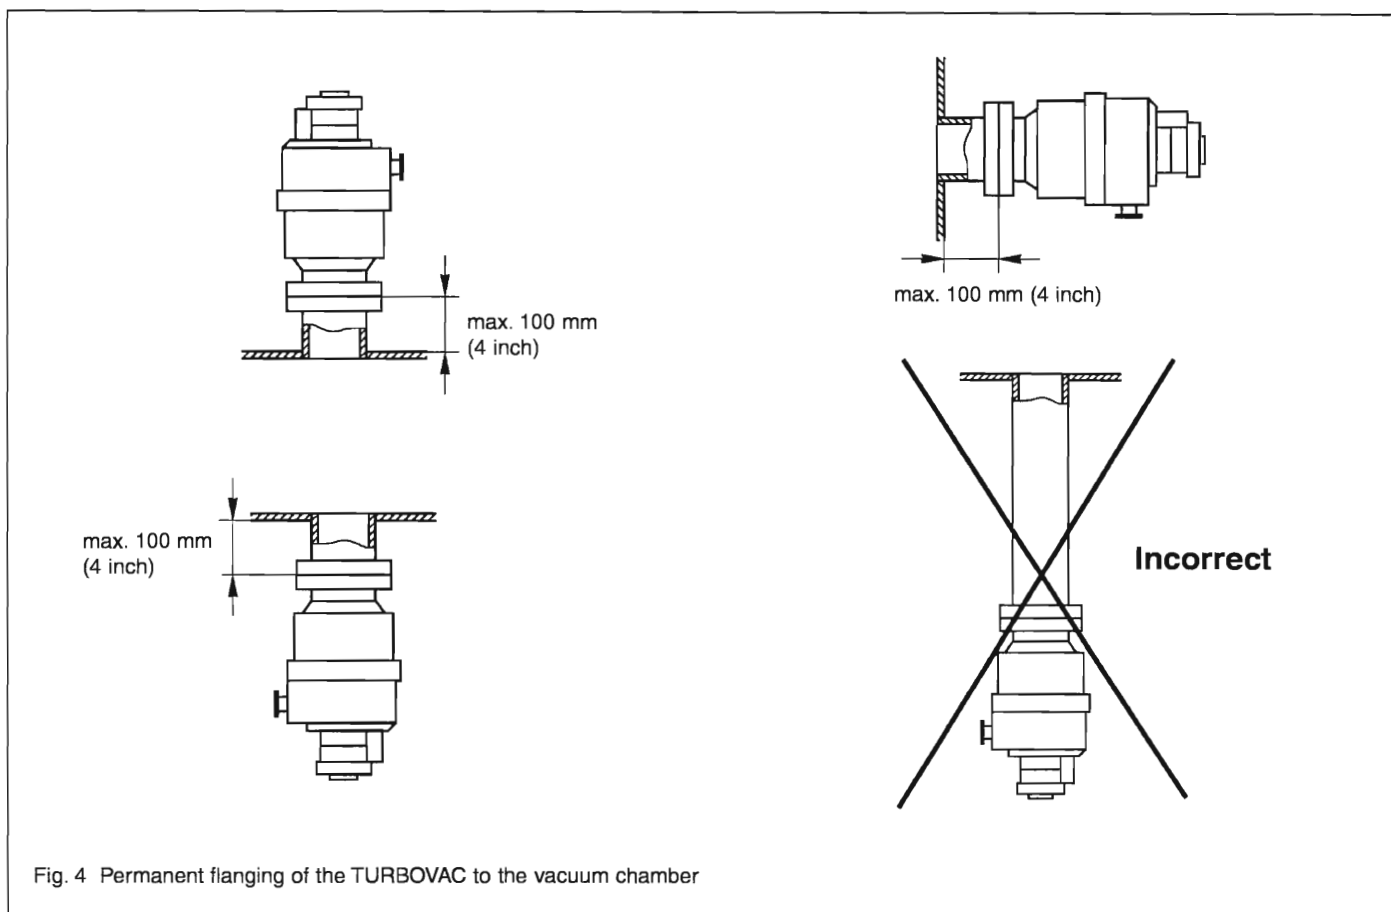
Permanent flanging of the TURBOVAC to the vacuum chamber
